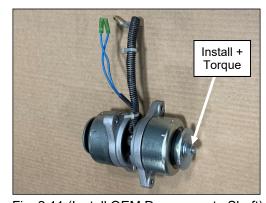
(Install OEM Dynamo onto Shaft)
